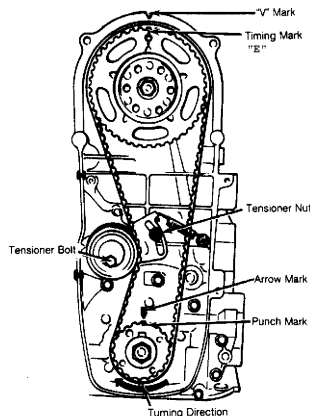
Aligning Timing Belt & Tensioner (Typical SOHC)
